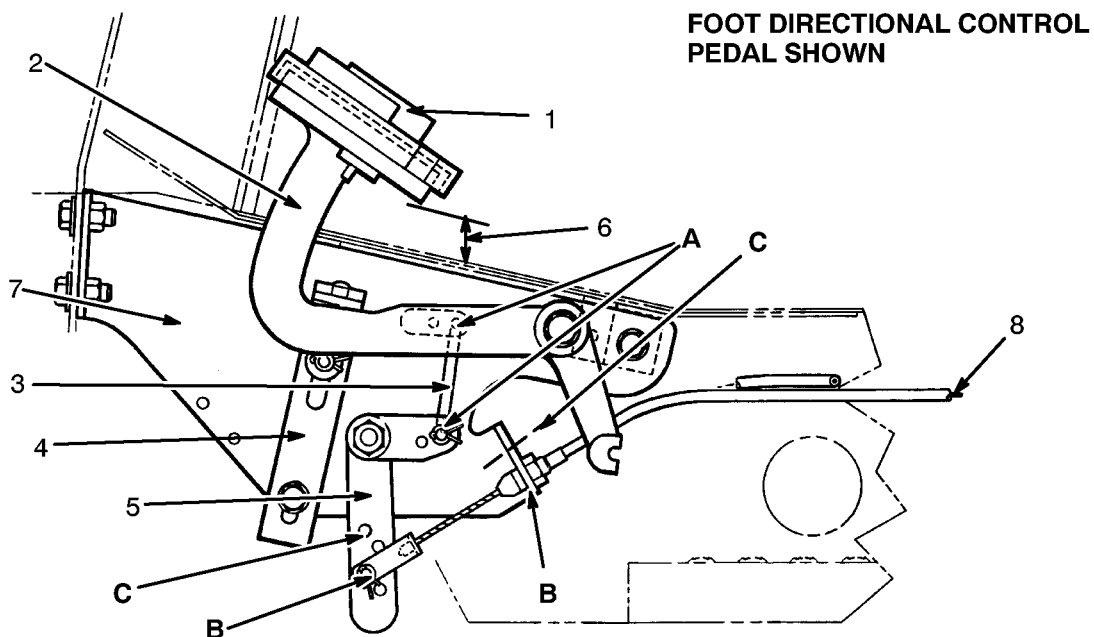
Throttle Arrangement, GC 040-065 RF/TF and GC/GLC 040-065 RG/TG/ZG
